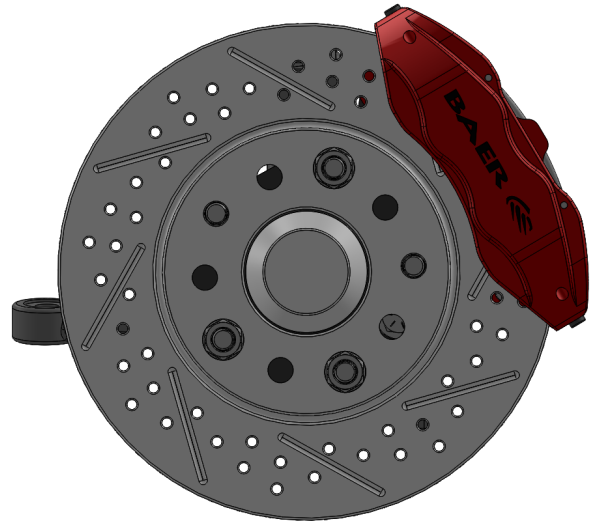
Caliper assembly installed outboard view (left driver side shown)
